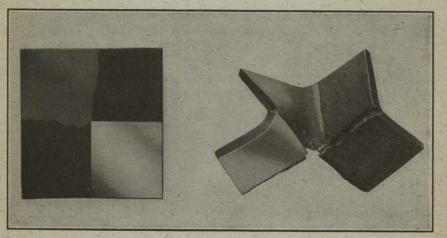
Steel, copper, brass, and bronze welded together.
